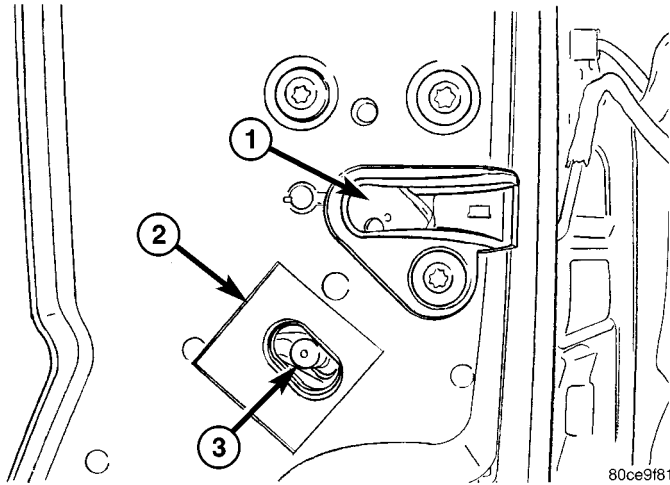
LATCH ADJUSTMENT SCREW - TYPICAL
